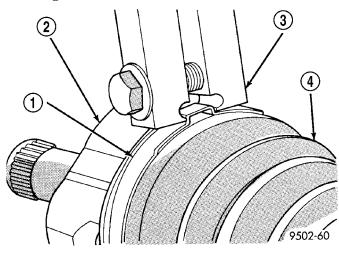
Crimping Tool Installed on Sealing Boot Clamp
